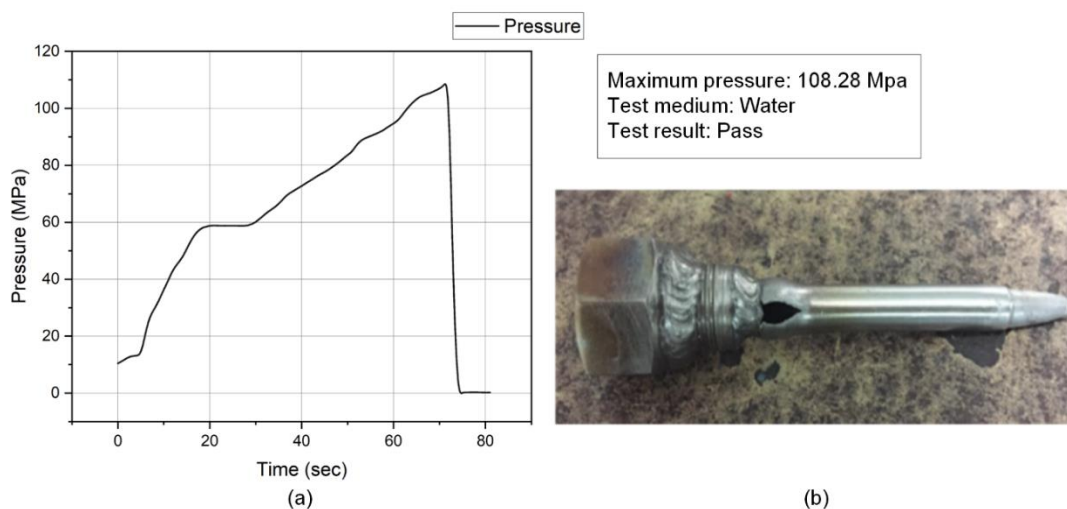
(a) Pressure profile with time obtained from hydraulic burst test indicating the failure of the tube at 108 MPa and (b) Hydraulic burst sample failed at D9 tube near the TIG joint
